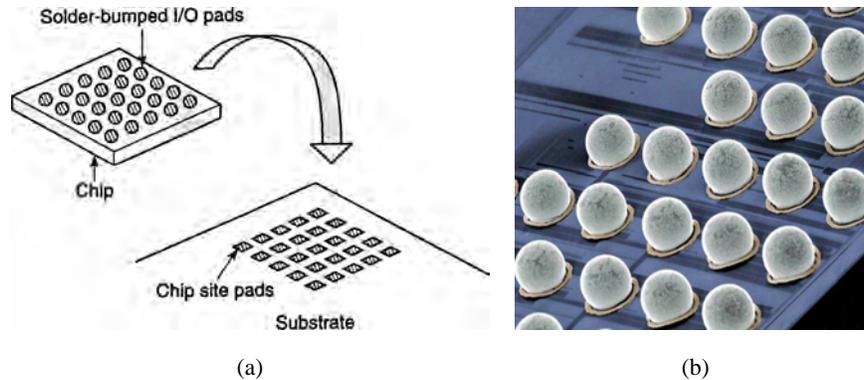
(a) Flip chip bonding and (b) a fabrication example [33].
